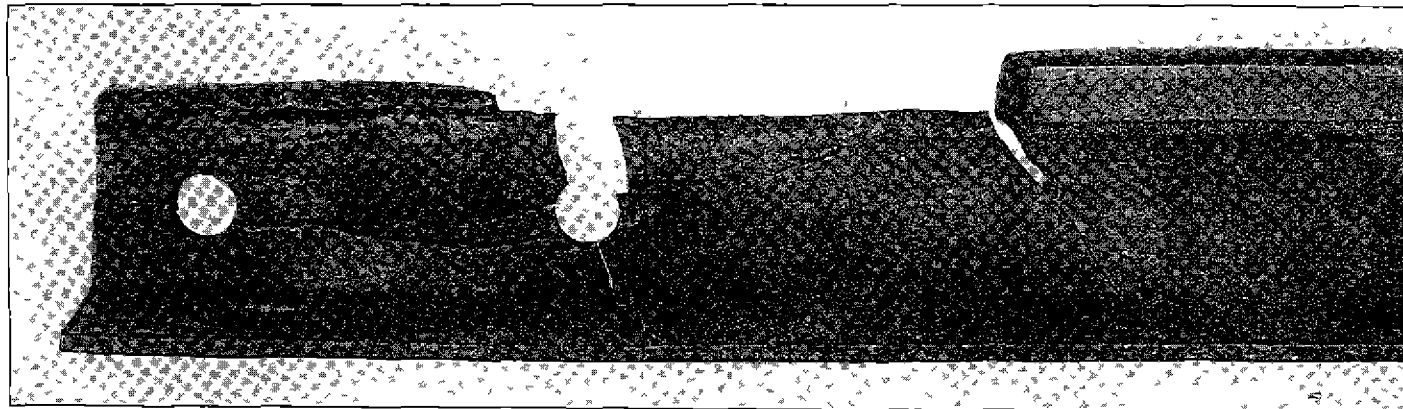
90 pound rail which failed near Friendship, N Y Side view, showing surface of piped fracture of web Head detached
